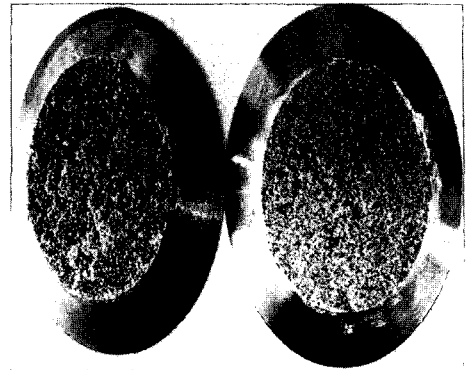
Fracture Surface after Test of Tensile Adhesion
